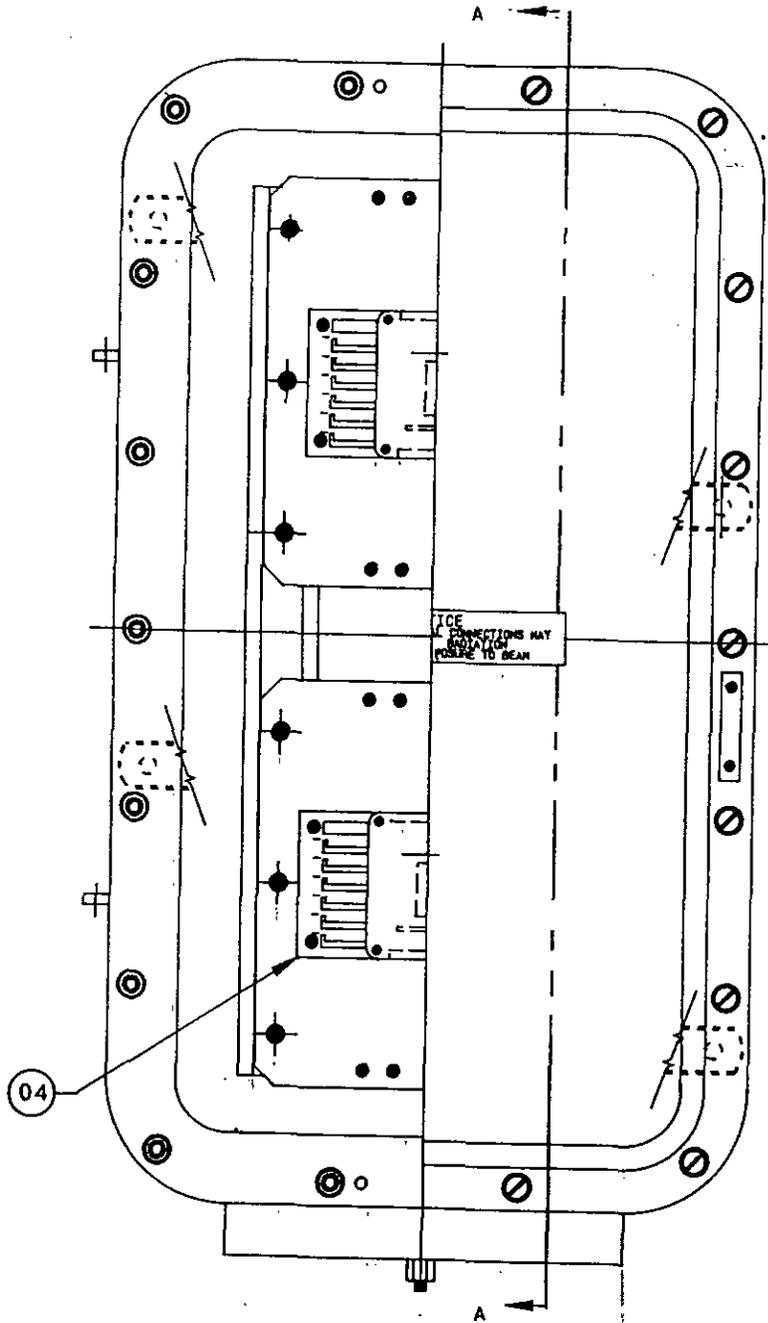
Patch panel kits M24728/1-002 installed in an enclosure assembly, M24728/2-001 - continued.
